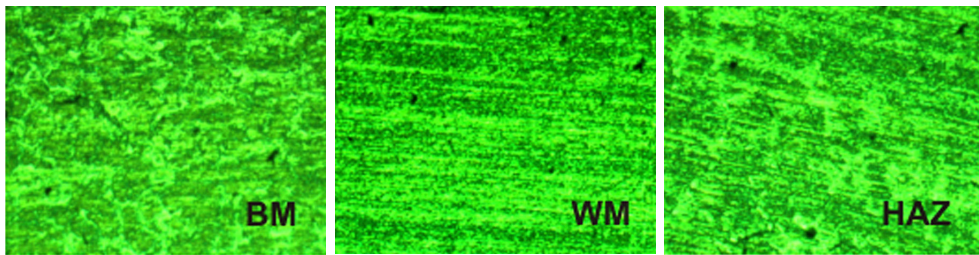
Metallographic aspects of the welded samples: Wirolloy NB
